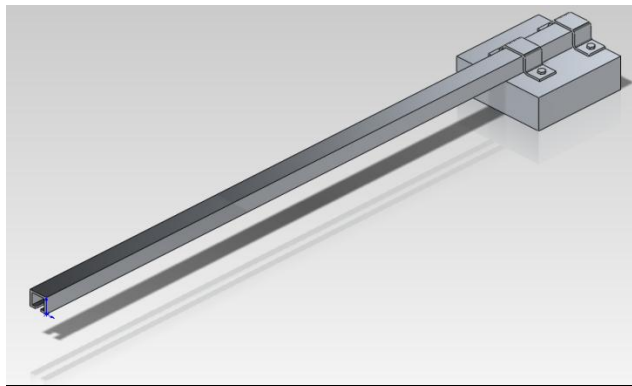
CARGO BOX ARM STRAPPED TO A SOLID SURFACE SO IT CAN BE LOADED AND TESTED FOR BENDING FAILURE.
